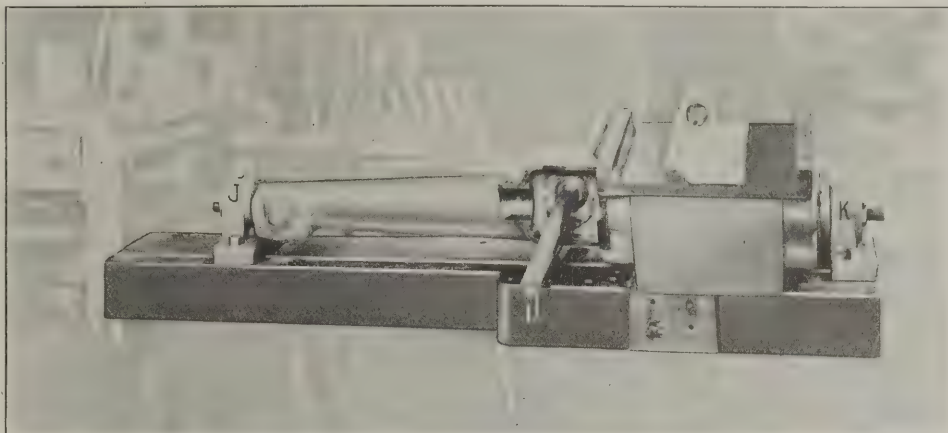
Planing Fixture for Heads, made on Same Principle as Jig in Fig. 1
